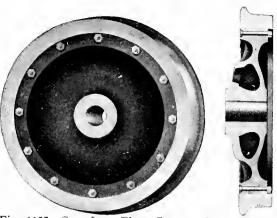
Cast Iron Plate Center with Tire Held by Shrinkage and Bolts.
